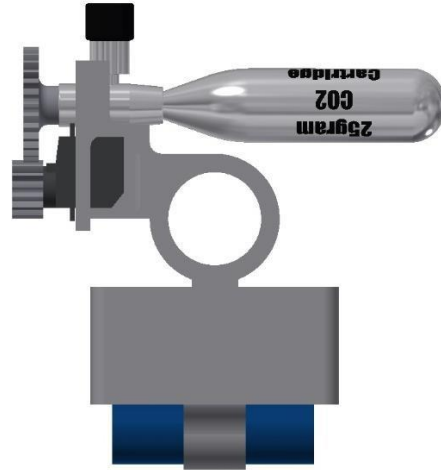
Prototype 4 Assembly by Jaco Jacobs 2022
